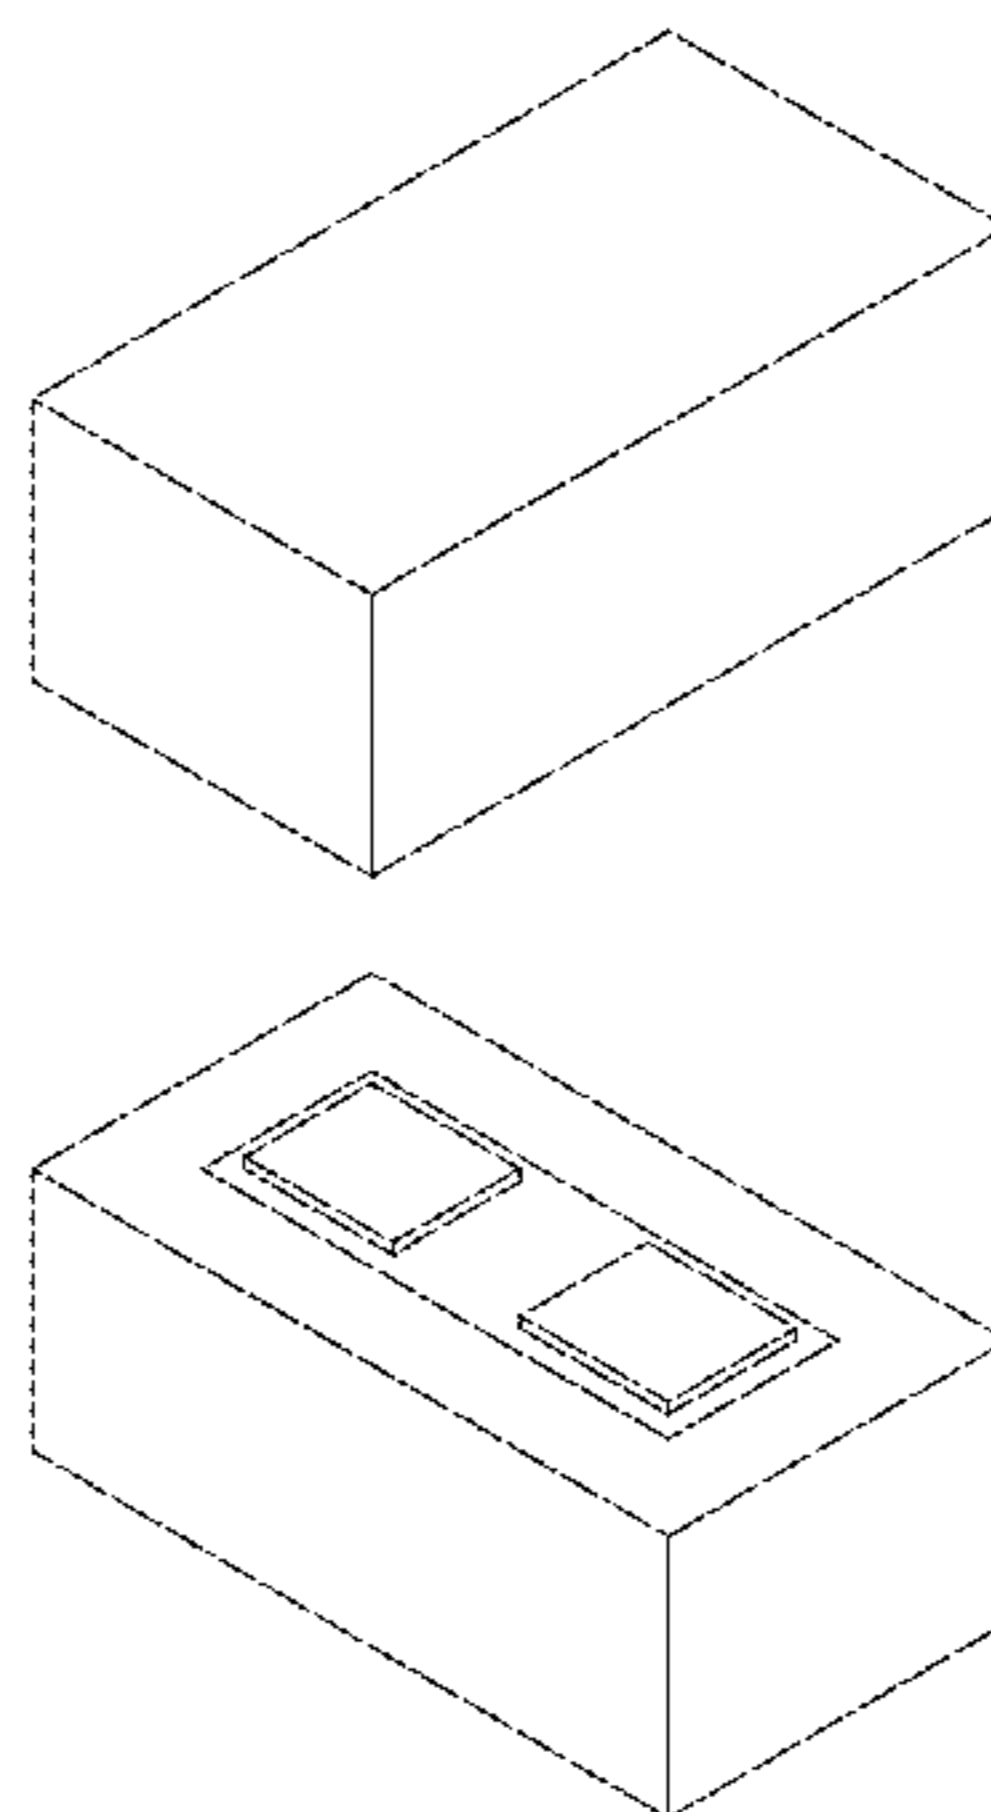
is a bottom perspective view thereof with a rear side surface and a right side surface;
